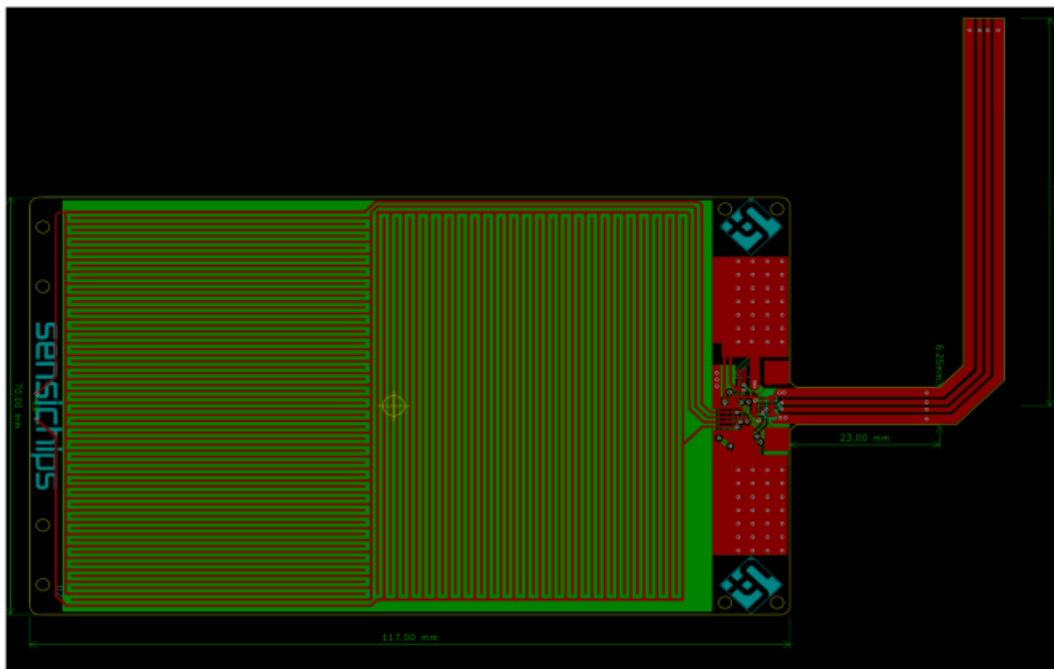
Final place and routing of the CMU-I flex board sent to manufacturing.
